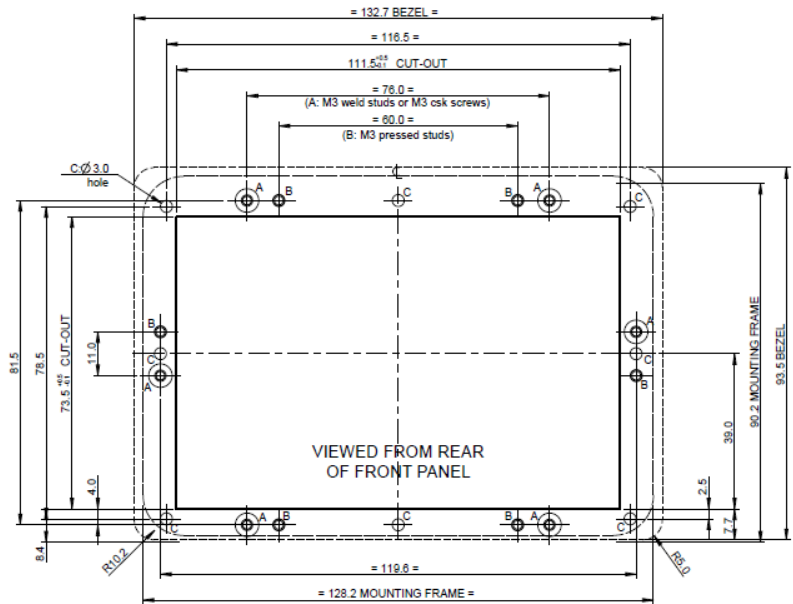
VM800B 4.3" Panel Mount Dimensions
